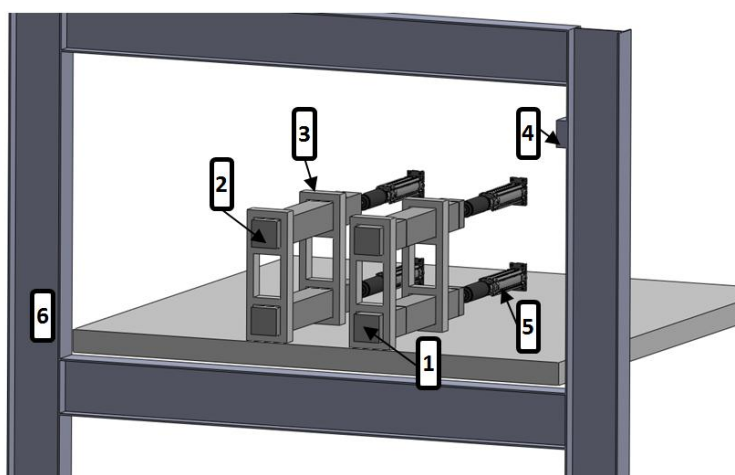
DETAILED 3D MODEL OF THE SLIDE ASSEMBLY EMPLOYED IN A CAGE ARRESTING DEVICE CONCEPT USING CONVEYANCE MOUNTED HYDRAULICALLY ACTUATED CLAMP BEAMS.
